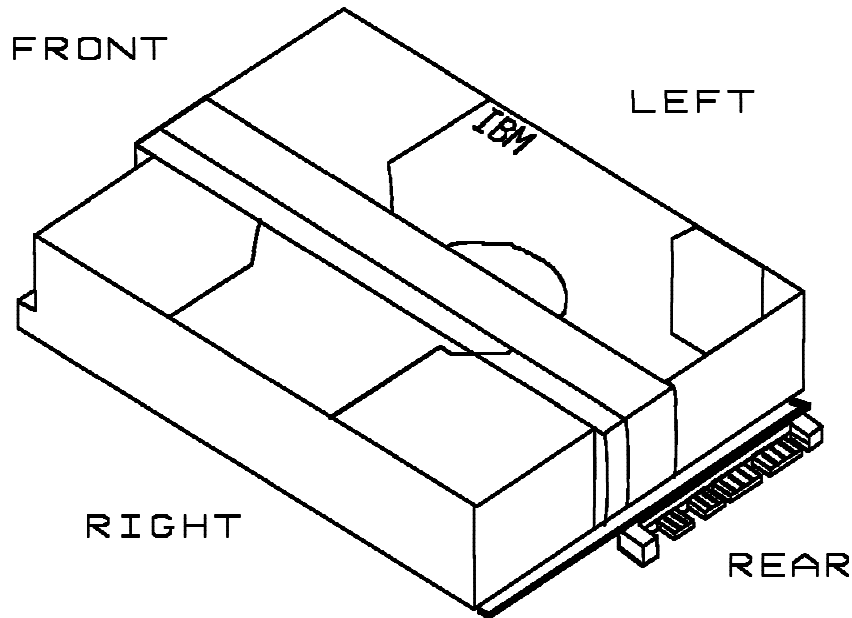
Ultrastar 2XP* Disk Drive Assembly
